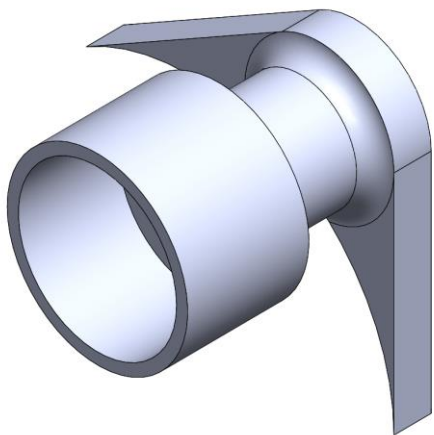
Front view of the pin mill motor housing. The motor goes into the wide cylinder on the left.
